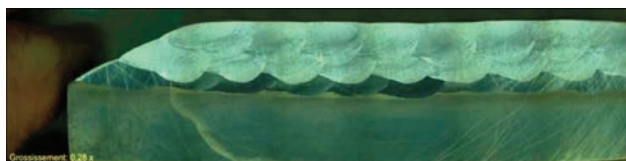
Submerged arc cladding with cored wire EC385. Macrography-stinger bead technique
